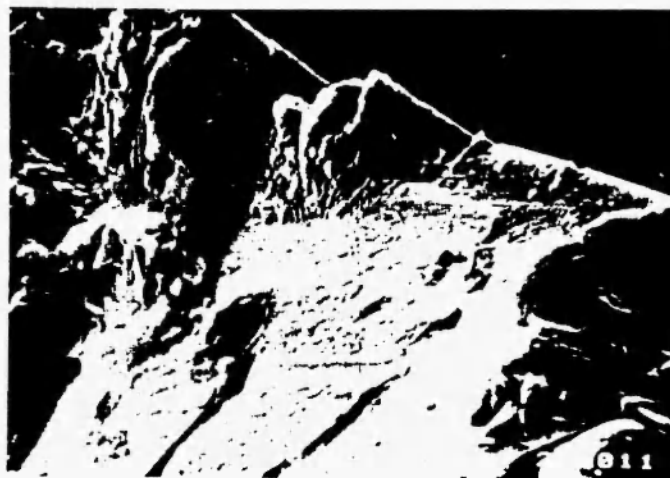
SEM observation of the fracture surface showing a slip plane at the site of the initiation of a fatigue failure.
